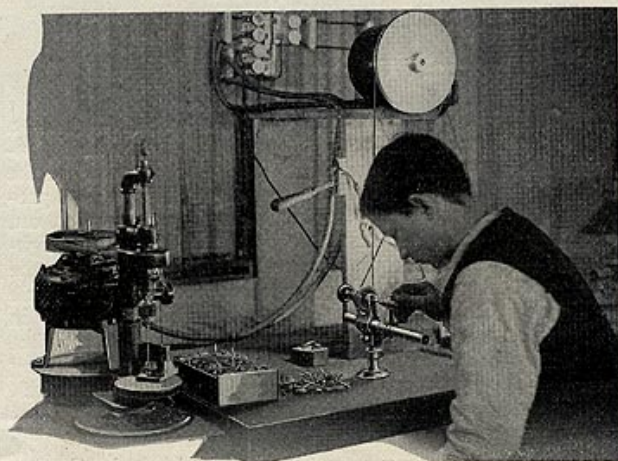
GREAT ACCURACY REQUIRED IN DRILLING SPRAYING NOZZLE
